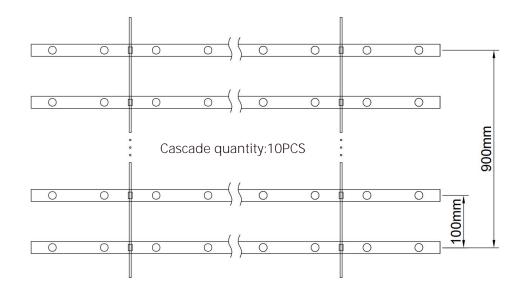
Assembly drawing for HIGNTEK HUB-1130SA-024016.
